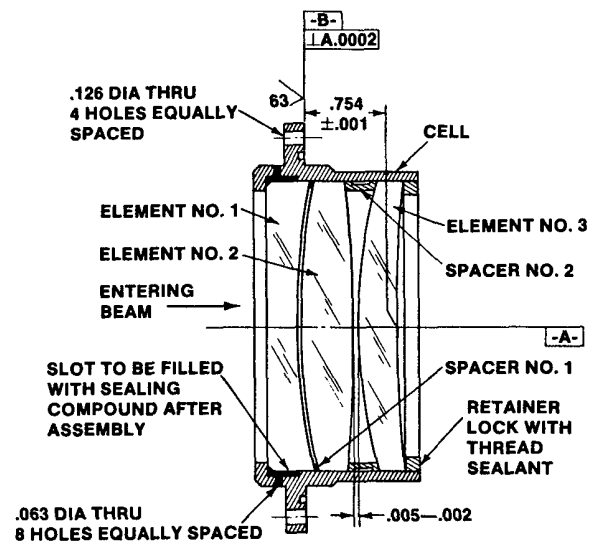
Example of a high performance telescope objective subassembly. Dimensions are inches.
